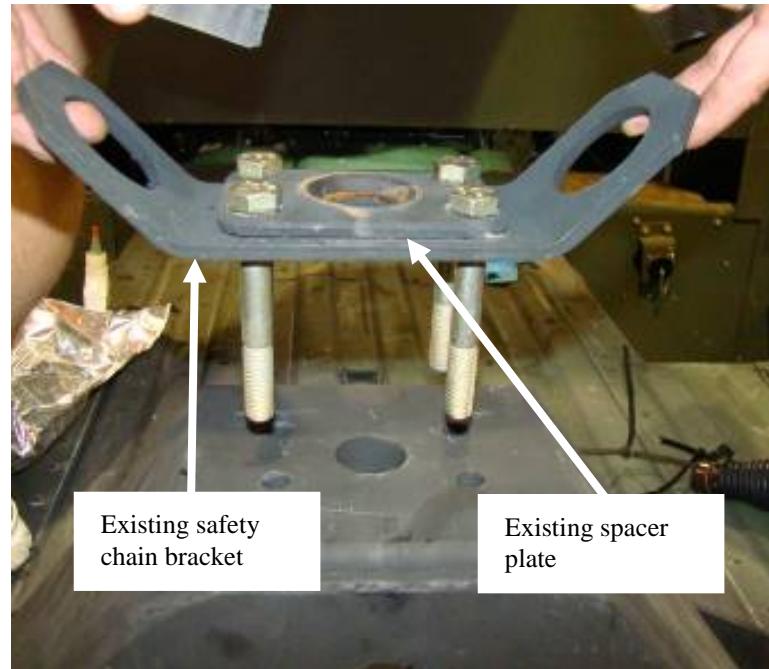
Pintle Bracket Assembly Attached to Pintle Extension
